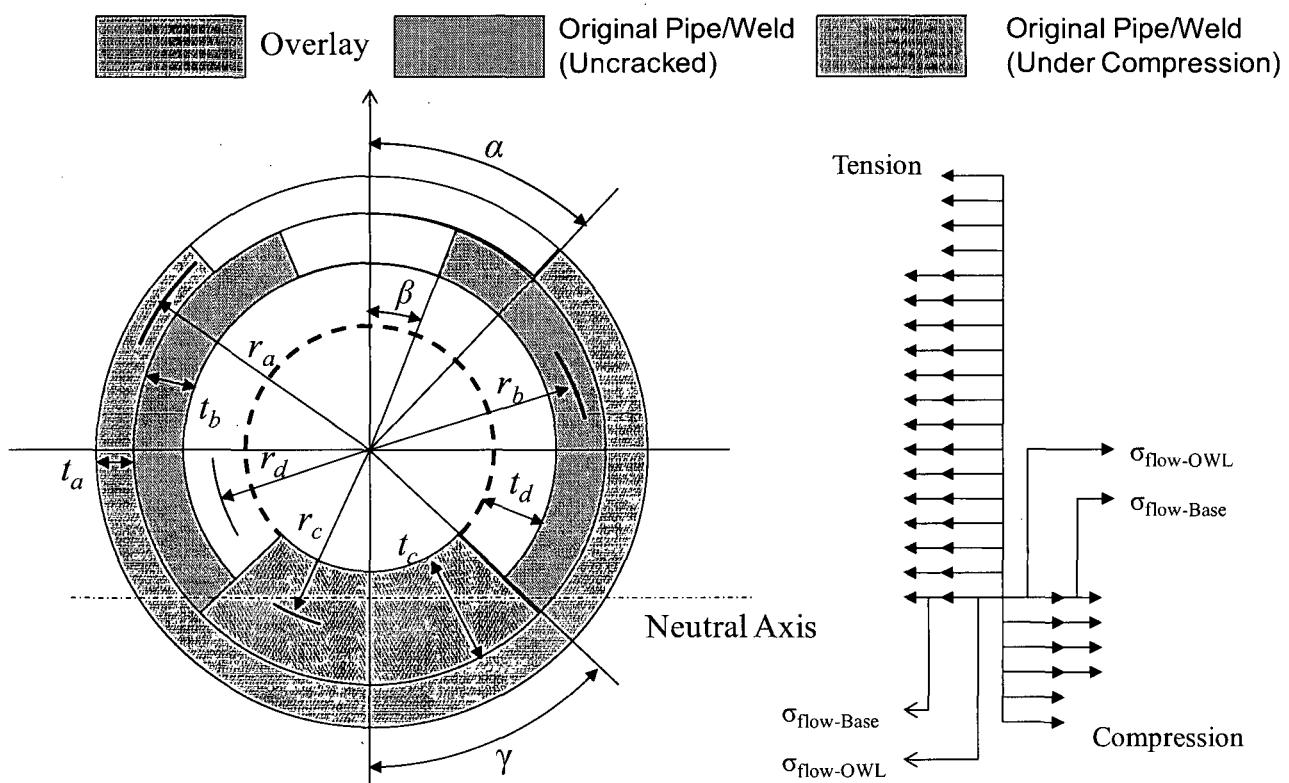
Schematic of a Circumferentially Cracked Section with Weld Overlay
